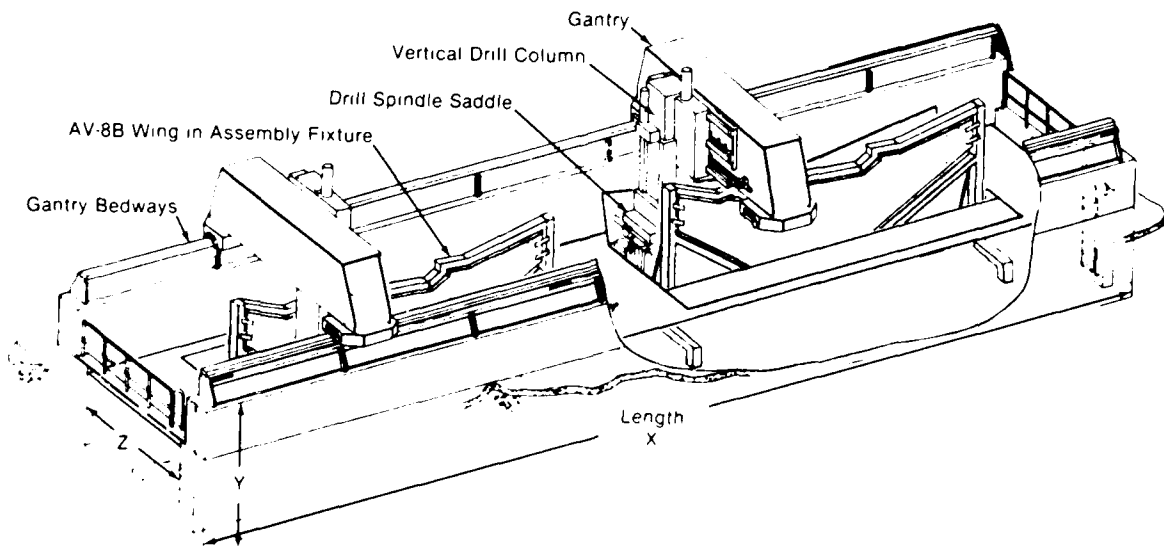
The ADS is Shown with Two AV-8B Wings, but is Capable of Drilling any Assembly that Fits in the Operating Envelope
